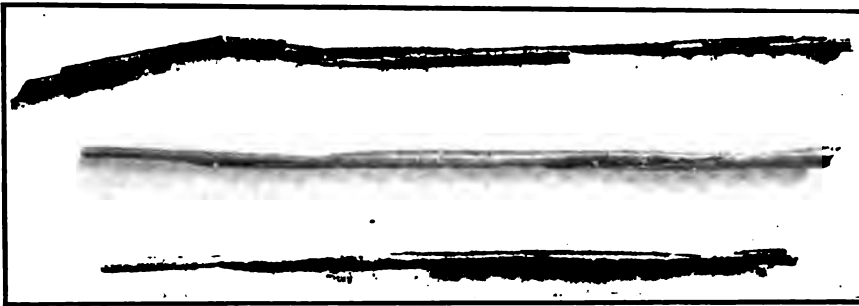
Chips milled from a steel forging. Courtesy of Tabor Manufacturing Company.
